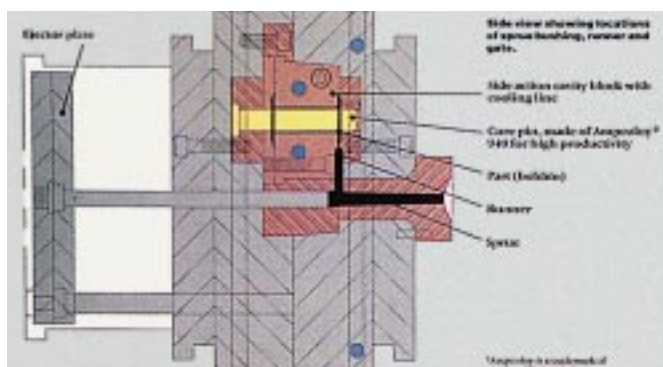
Modular mould for solenoid coil bobbins (continued).
